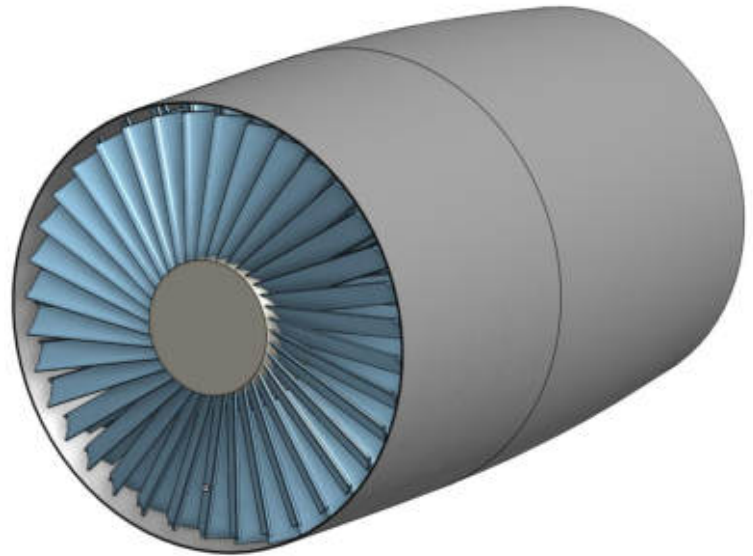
Compressor assembly, with outer shell for further stages (combustion, turbine, exhaust, etc) added behind compressor stages
